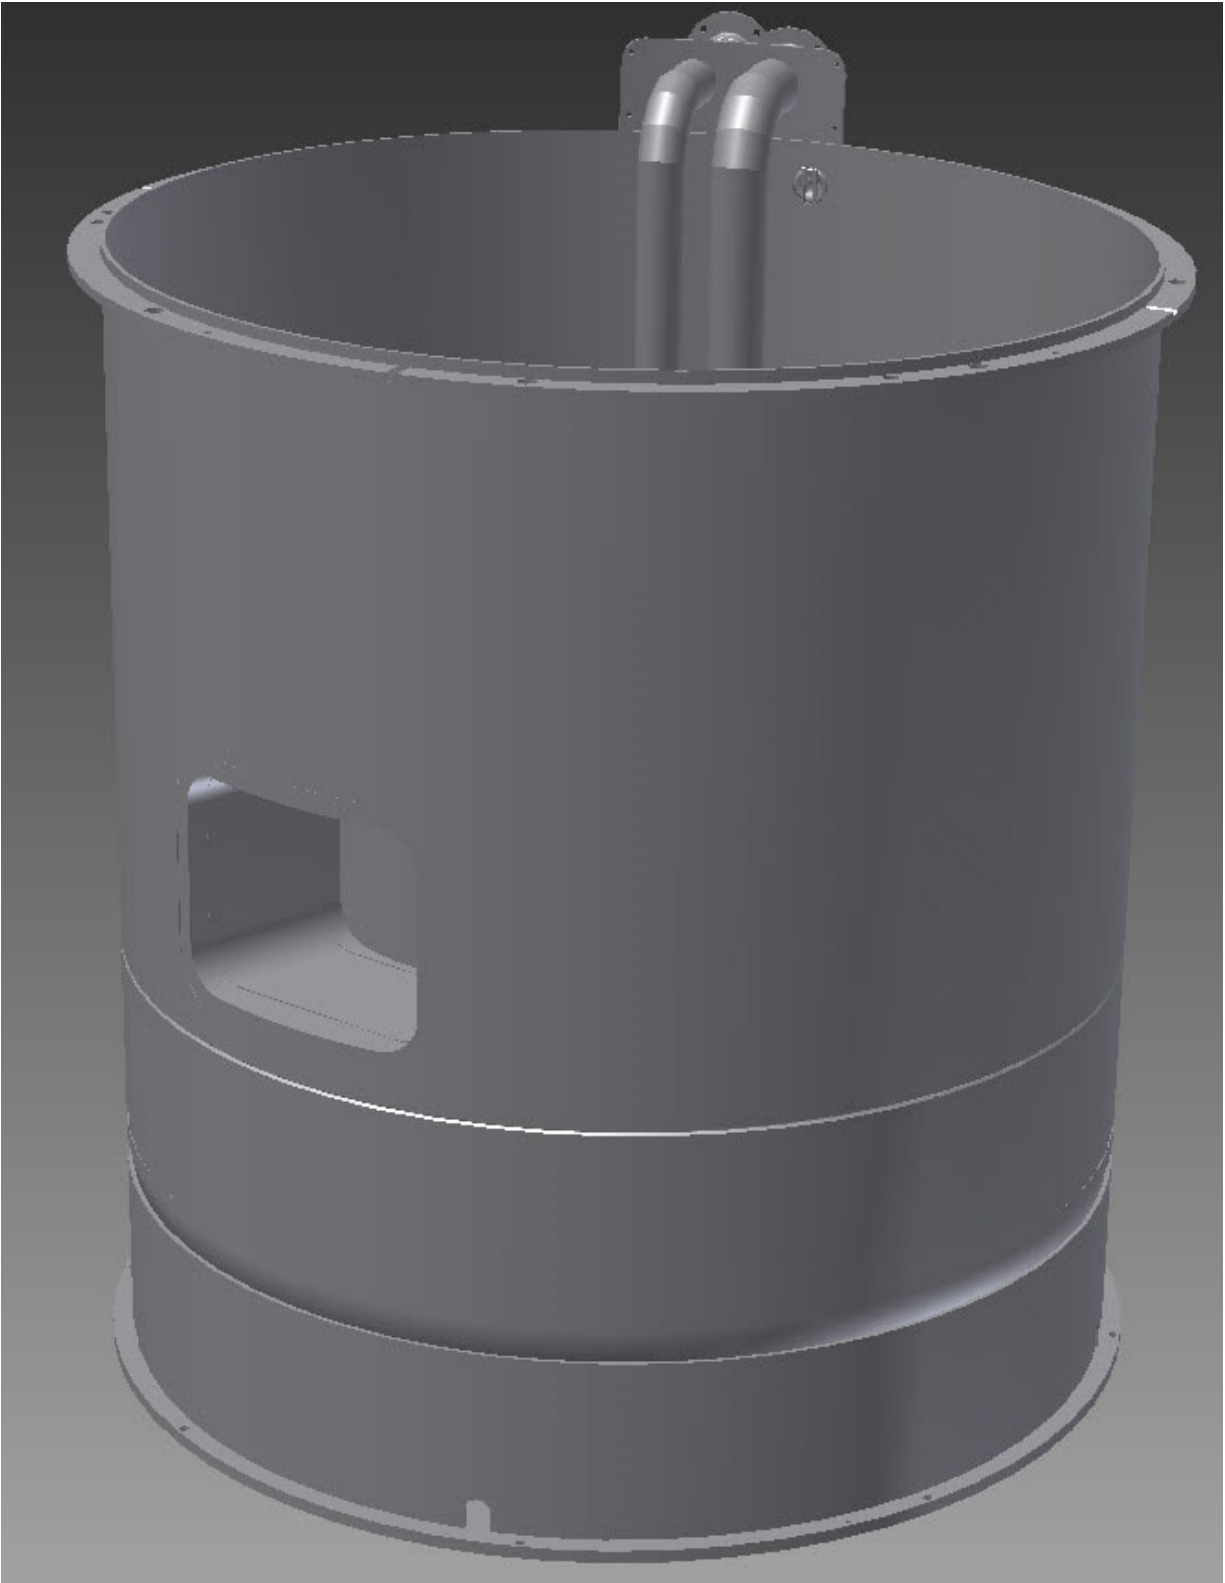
View of the outside of the SCA tank weldment, showing the coolant pipes, the overflow port, one inspection hole at the bottom, and the cold neutron source well (left).
